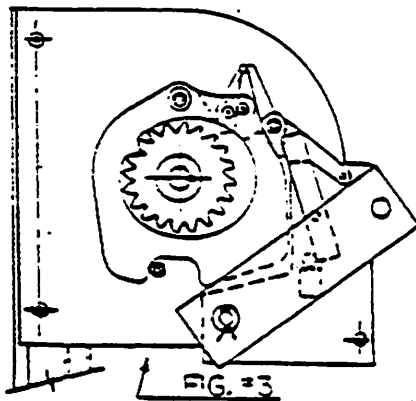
Reassemble the Support Arm into bushed hole in 'Hoist Mounting' Plate, push all the way in to stop. Reassemble Pivot Arm over extended shaft using washers and cotter pin. Both the Support Arm and Pivot Arm to be positioned as shown in FIG. #3, and must operate freely.
